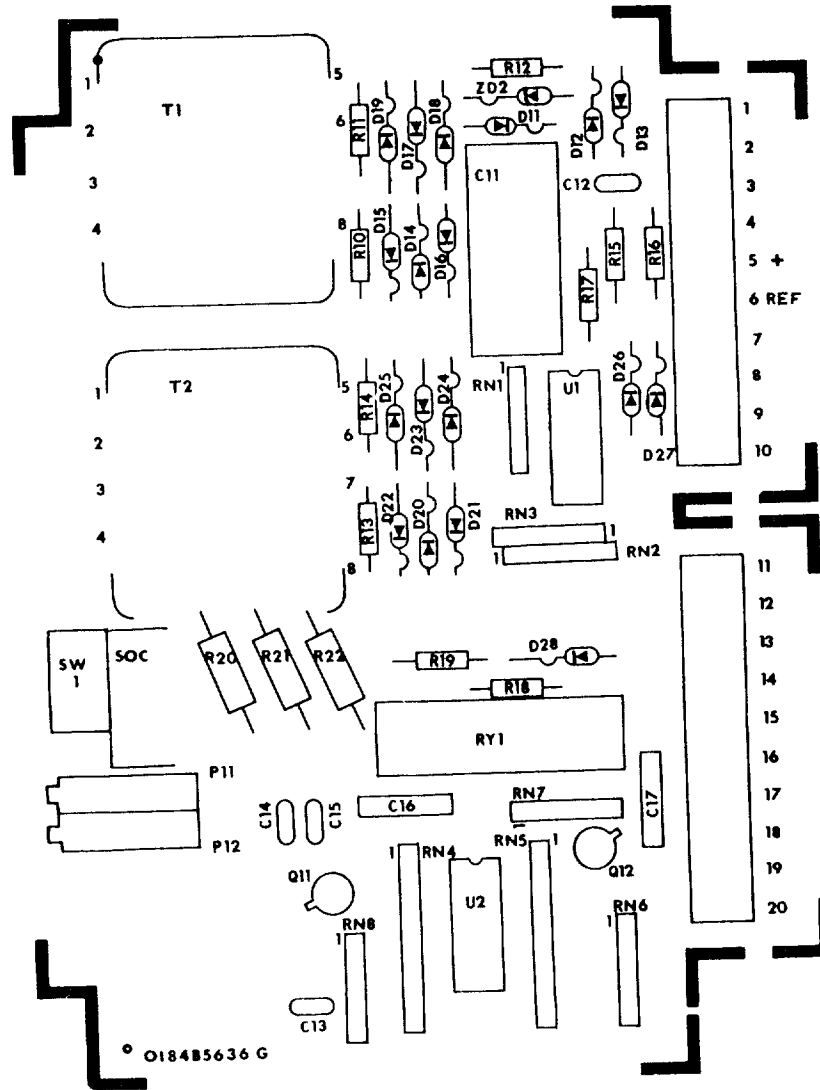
(0184B5636 [3]) Physical Parts Location Diagram of Printed Circuit Card "B"
